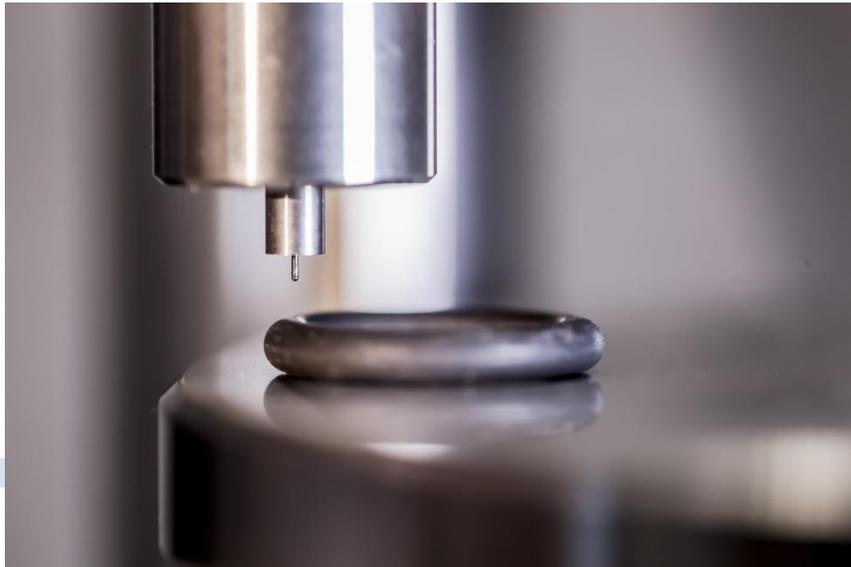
Hardness test on an O-ring (method IRHD, CM) (Photo: O-Ring Prüflabor Richter GmbH)
